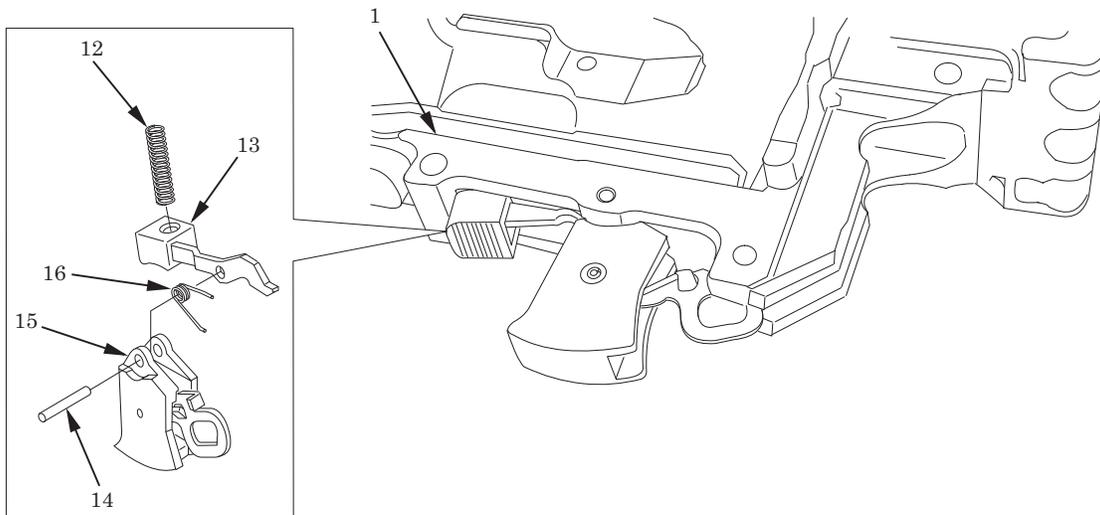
Removal of Barrel Release Lever and Trigger Assembly.
